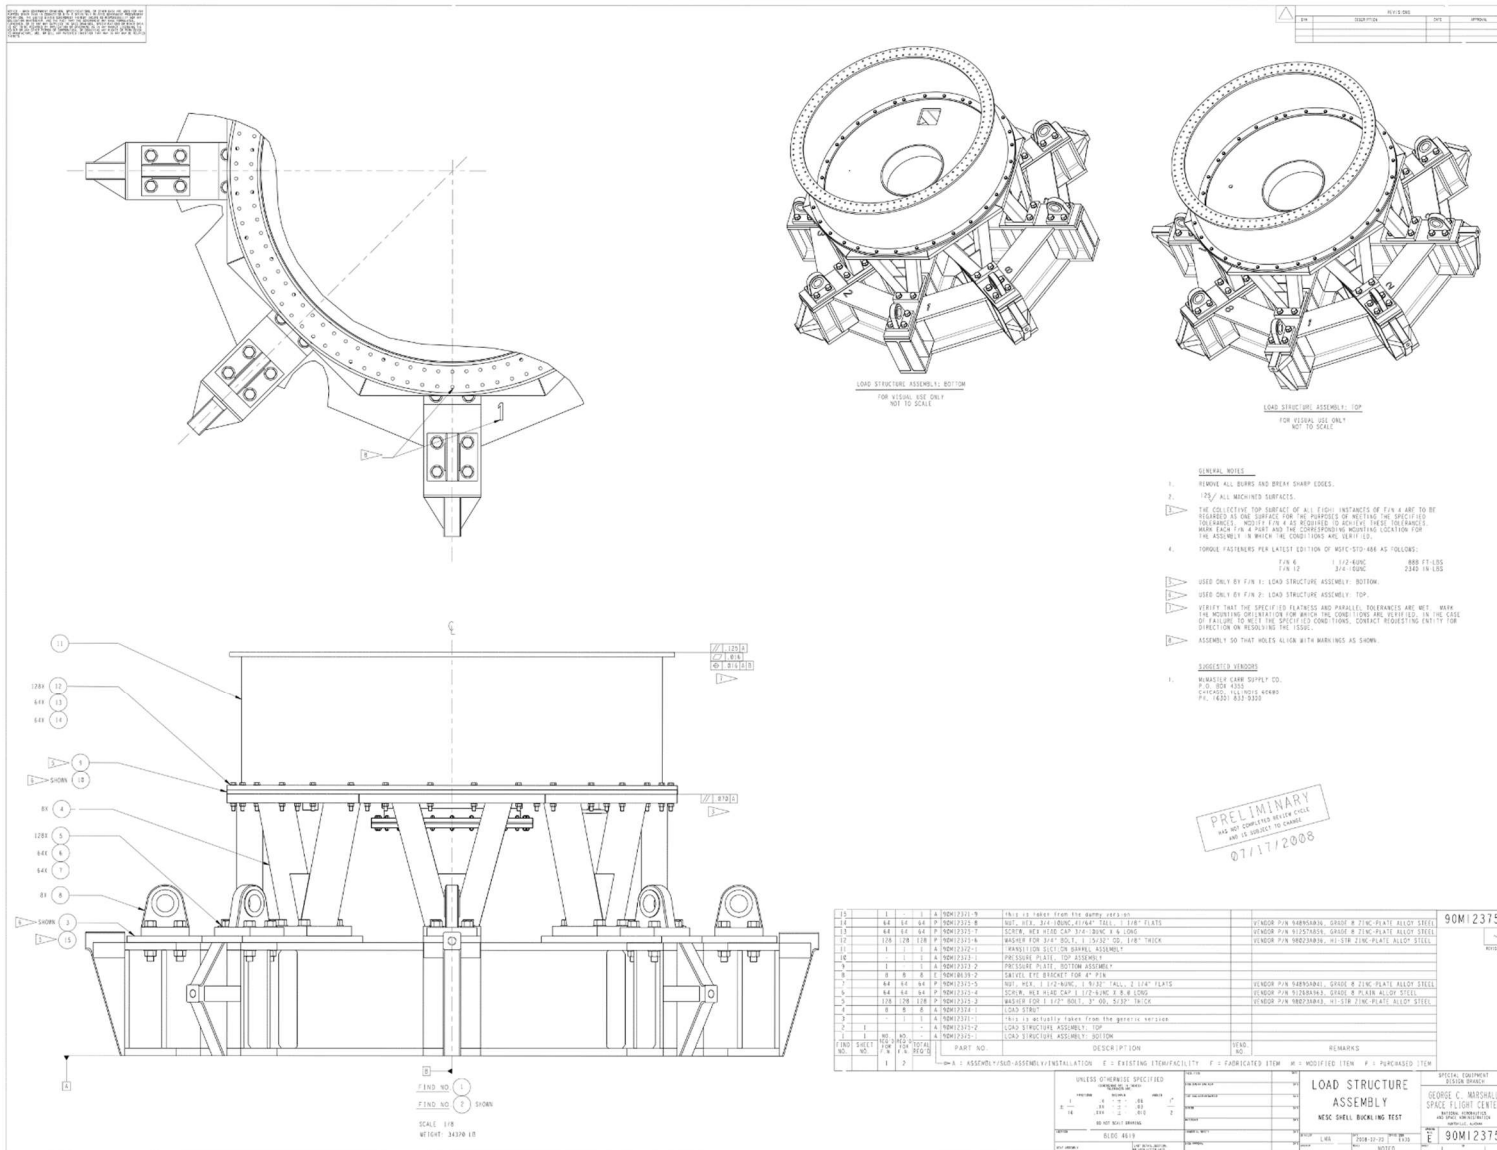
Load structure assembly, MSFC Drawing 90M12375.
